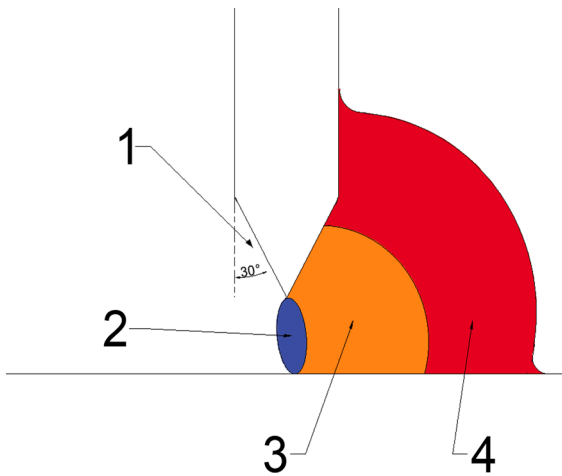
Welding procedures 1: Machining the stiffener 2: Tack welding 3: Root welding 4: Cap welding.
